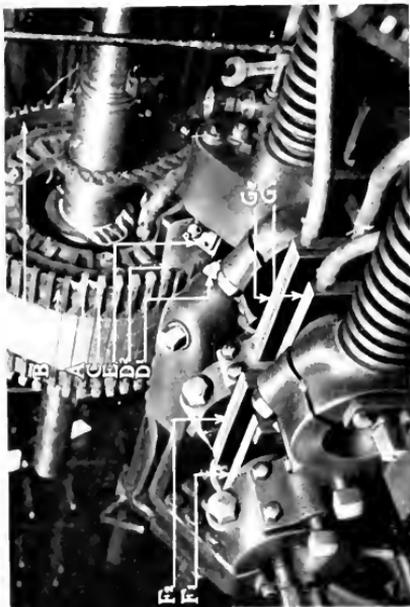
Close up View of Electric Welding Machine shown in Fig. 1
